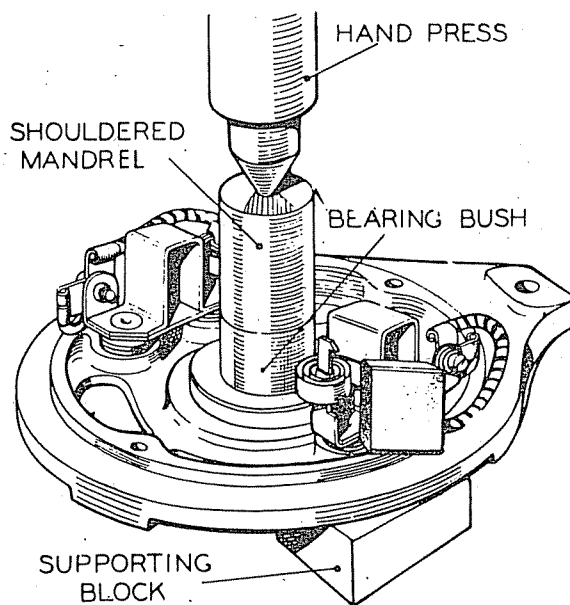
Method of Fitting Porous Bronze Bearing Bush.
